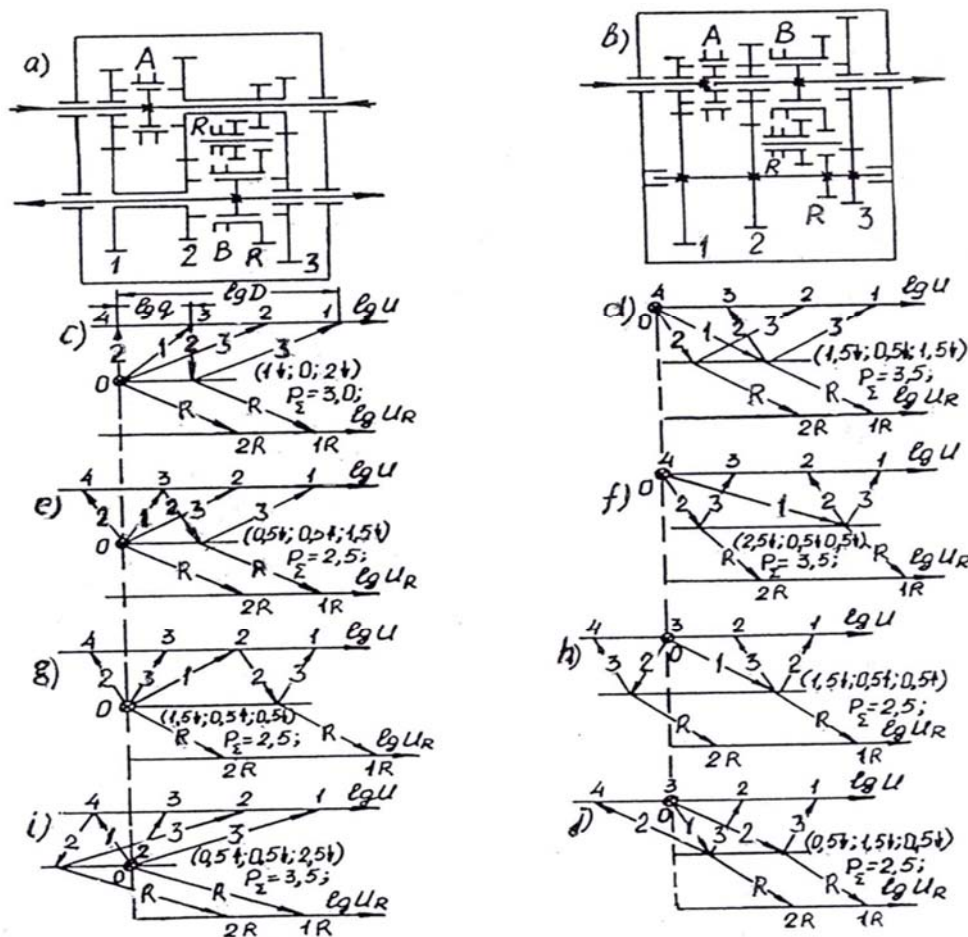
4-step modified GB: on the left - two-shaft non-coaxial; on the right - three-shaft coaxial; *a, b* - kinematic diagrams; *c, e, g, i, g, f, h, j* - fragment of ray path diagrams; 1, 2, 3 - couples of forward gears; R - train of reverse gears; A, B - shifting clutches.
